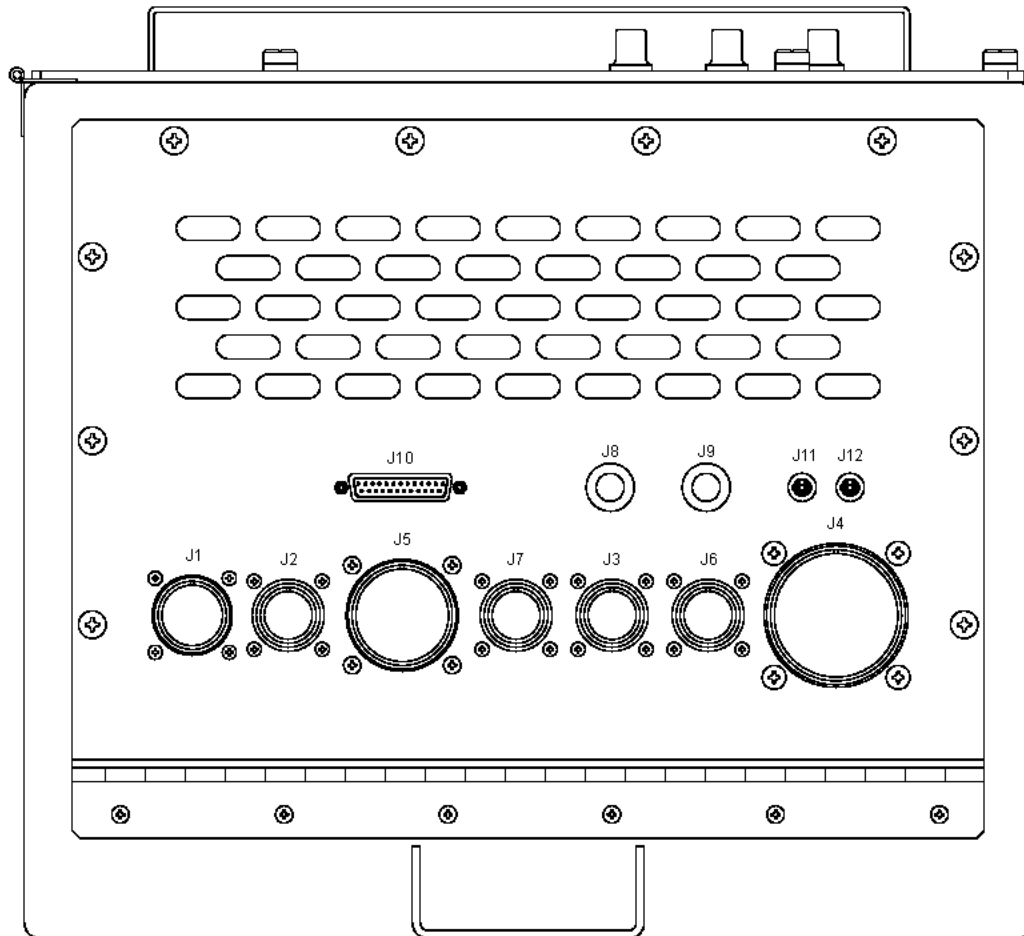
Cabinet-Mounted Components (Unit 3 or 8) (Sheet 1 of 2)
